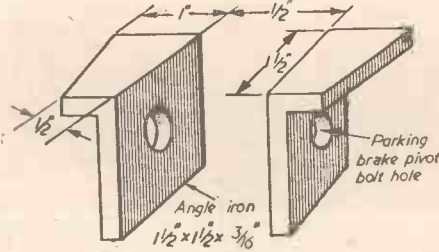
Angle irons to be welded to hitch plate.
